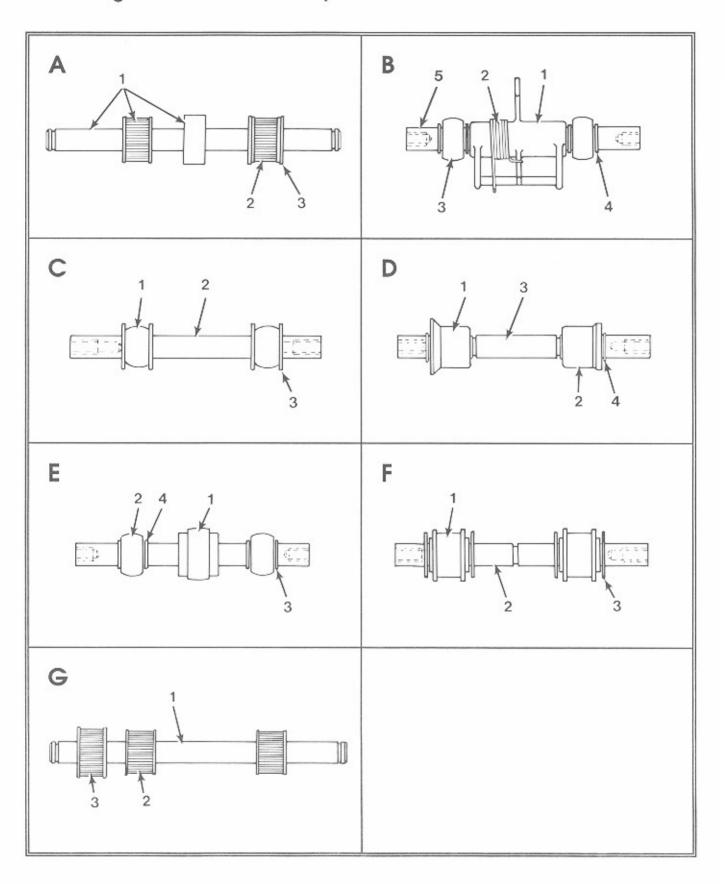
8. OBA-2 Transport Assembly (Sheet 3)
